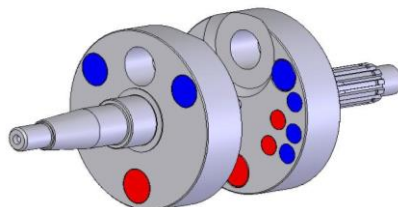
Example TM 125 K9-C / KZ10 crankshaft modification
